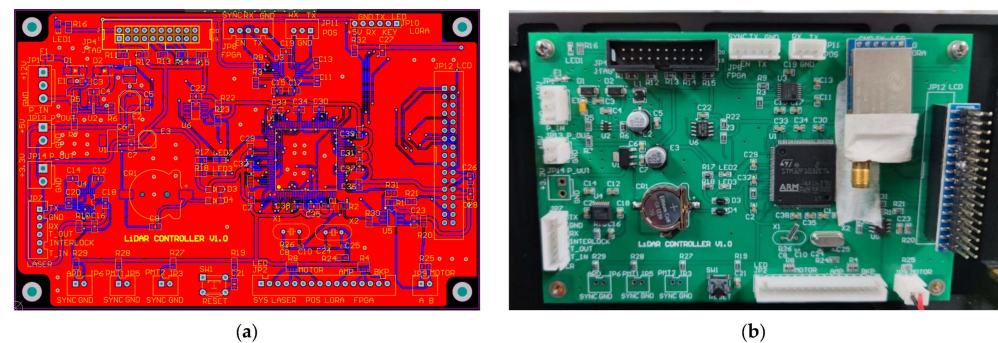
(a) Top view of the PCB and (b) the physical diagram of the control board.
